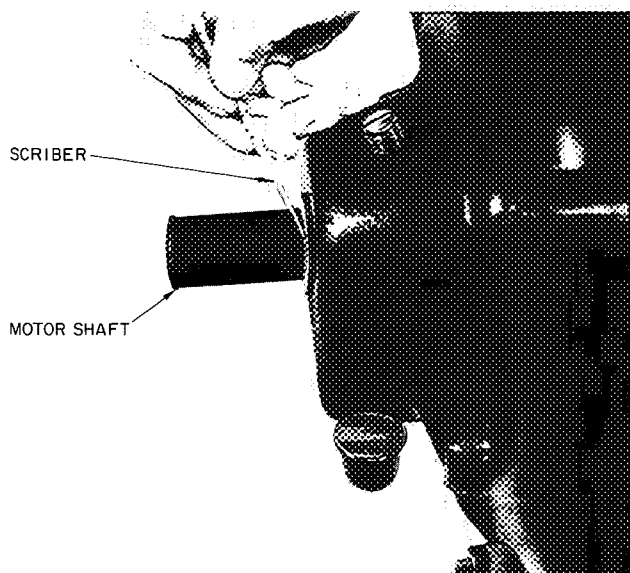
Scribing a Line to Indicate Running Position of Motor Shaft Running
